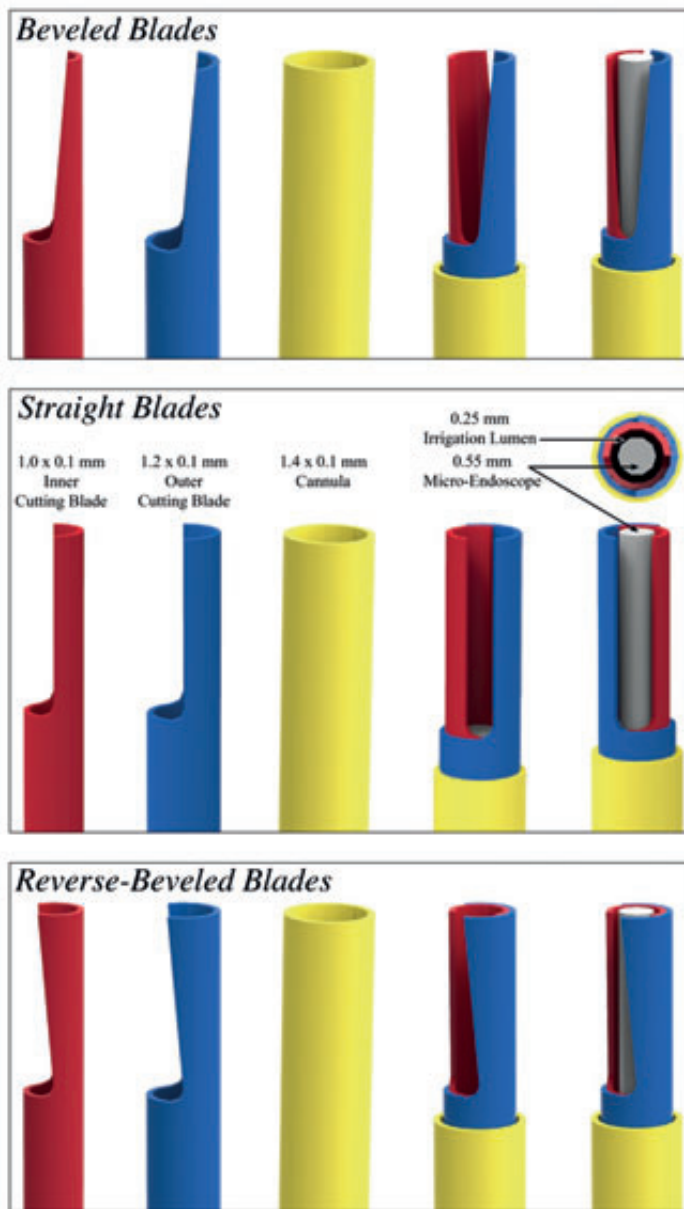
Biopsy Needle Tip Designs. The biopsy needle tip consists of three parts: an inner cutting blade ($\text{Ø}1.0 \times 0.1$ mm, red), an outer cutting blade ($\text{Ø}1.2 \times 0.1$ mm, blue), and an optional cannula ($\text{Ø}1.4 \times 0.1$ mm, yellow). The $\text{Ø}0.55$ micro-endoscope can be placed in the $\text{Ø} 0.8$ mm lumen of the biopsy
